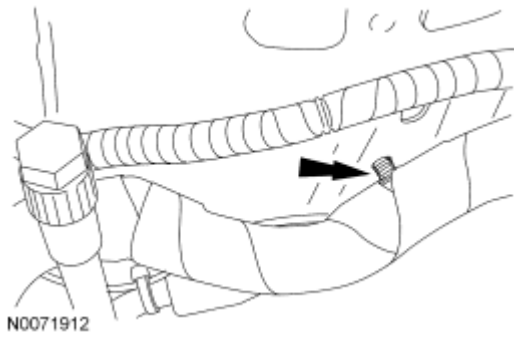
Locating Pin-Type Wiring Harness Retainer
